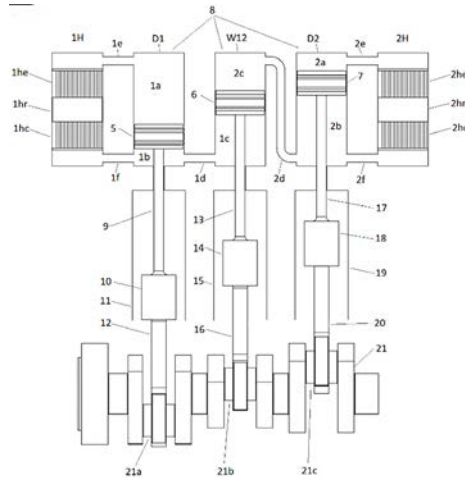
Principal sketch of one cylinder bank of the HoegTemp heat pump. From the left: heat exchanger, displacer cylinder, power cylinder, displacer cylinder, heat exchanger. Crankshaft with flywheel on the left and 4 main bearings.
